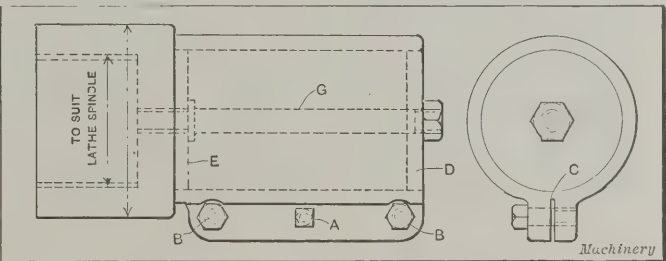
Fixture for Holding and Clamping Piston Rings when taking the Finishing Cut
